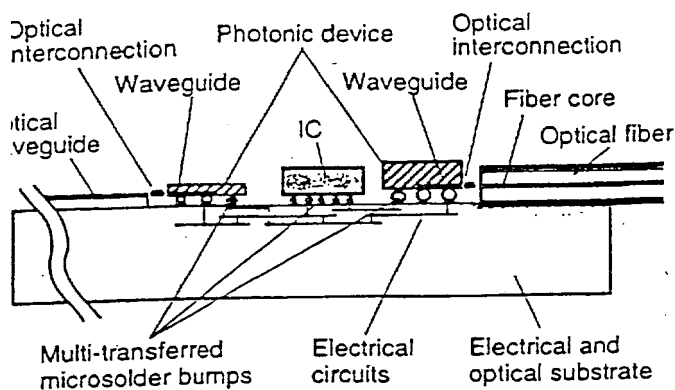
Optical packaging application using multi-transferred microsolder bumps.
